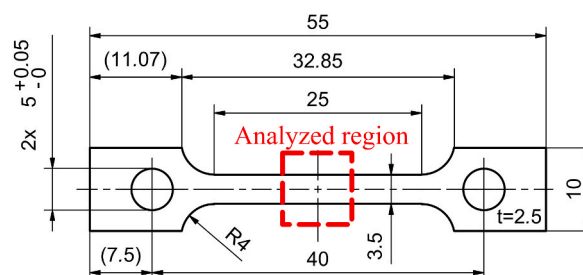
Technical drawing of the specimen for the slip trace analysis and the in-situ tensile tests.
